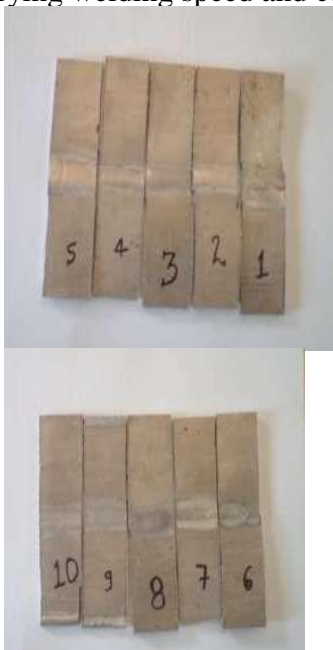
a) Welded specimen performed with welding speed 3mm/s and welding current 100, 105, 110, 120 and 130A for sample number 1 to 5.
